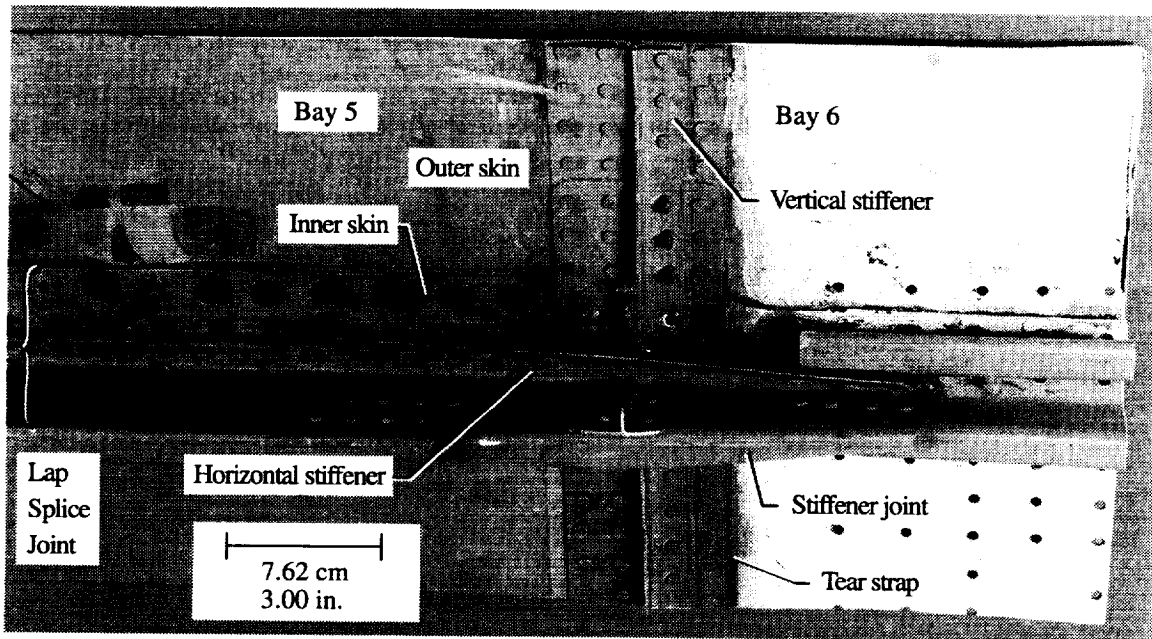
The photograph shows the inboard surface of the bay 5, bay 5/6 tear strap, and bay 6 regions. Structural features such as the tear strap, skin lap splice, vertical stiffener, stiffener joint, and horizontal stiffener are all visible.
